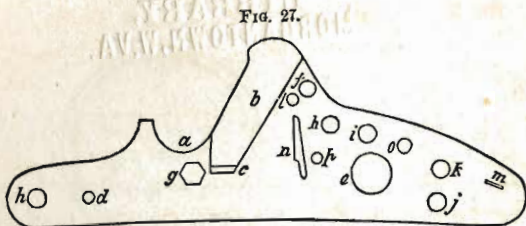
Lock-plate, half size, showing the position of the holes, &c. *a*, cone-seat notch; *b*, bolster; *c*, mainspring notch; *d*, hole for mainspring pivot; *e*, hole for arbor of tumbler; *f*, hole for cover-catch; *g*, hole for cover hinge stud; *h, h*, side-screw holes; *i*, hole for bridle-screw; *j*, hole for sear-screw; *k*, hole for sear-spring; *l*, hole for catch-spring screw; *m*, sear-spring stud-mortise; *n*, feed-finger slot; *o*, bridle pivot hole; *p*, feed-finger-spring-screw hole.
